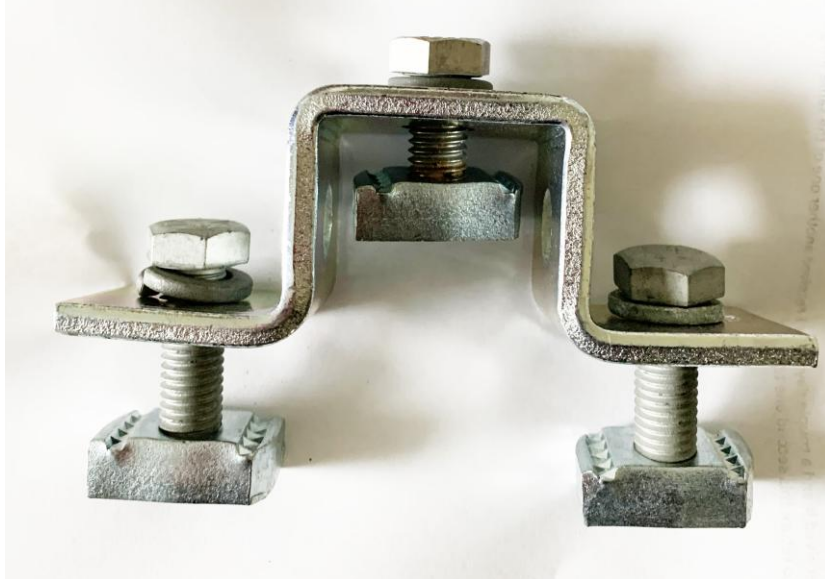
All Bolts requiring a Channel nut must be assembled in the following fashion. This is a Bolt and Channel Assembly. This does not come as an assembled part. You have to assemble each as required in the instructions.
